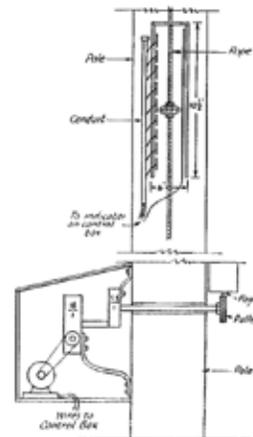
Two views of the pole, showing the direction indicator (above) and the rotating mechanism (below). The direction indicator uses a sliding contact fastened directly to the control rope. The contacts, in turn, are wired to the 16 dial lamps shown in Fig. 3.
